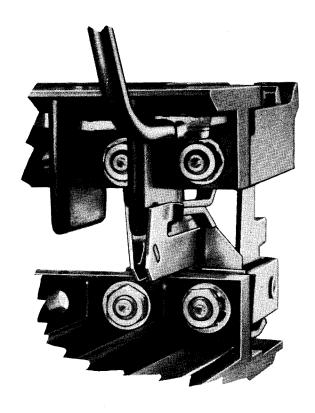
Auxiliary Short Circuiting Switch (Enlarged View)
